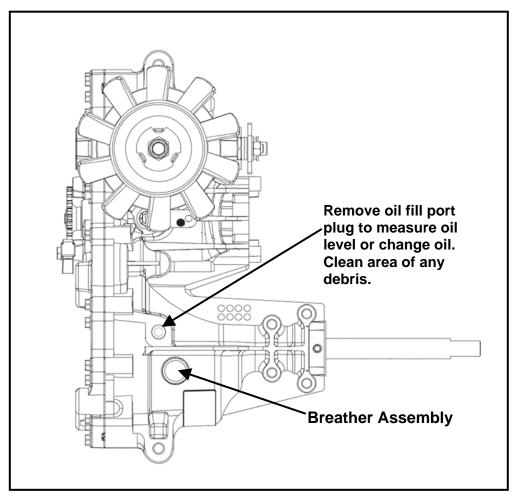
Top view of RH transaxle. Oil fill port plug and breather assembly locations.
